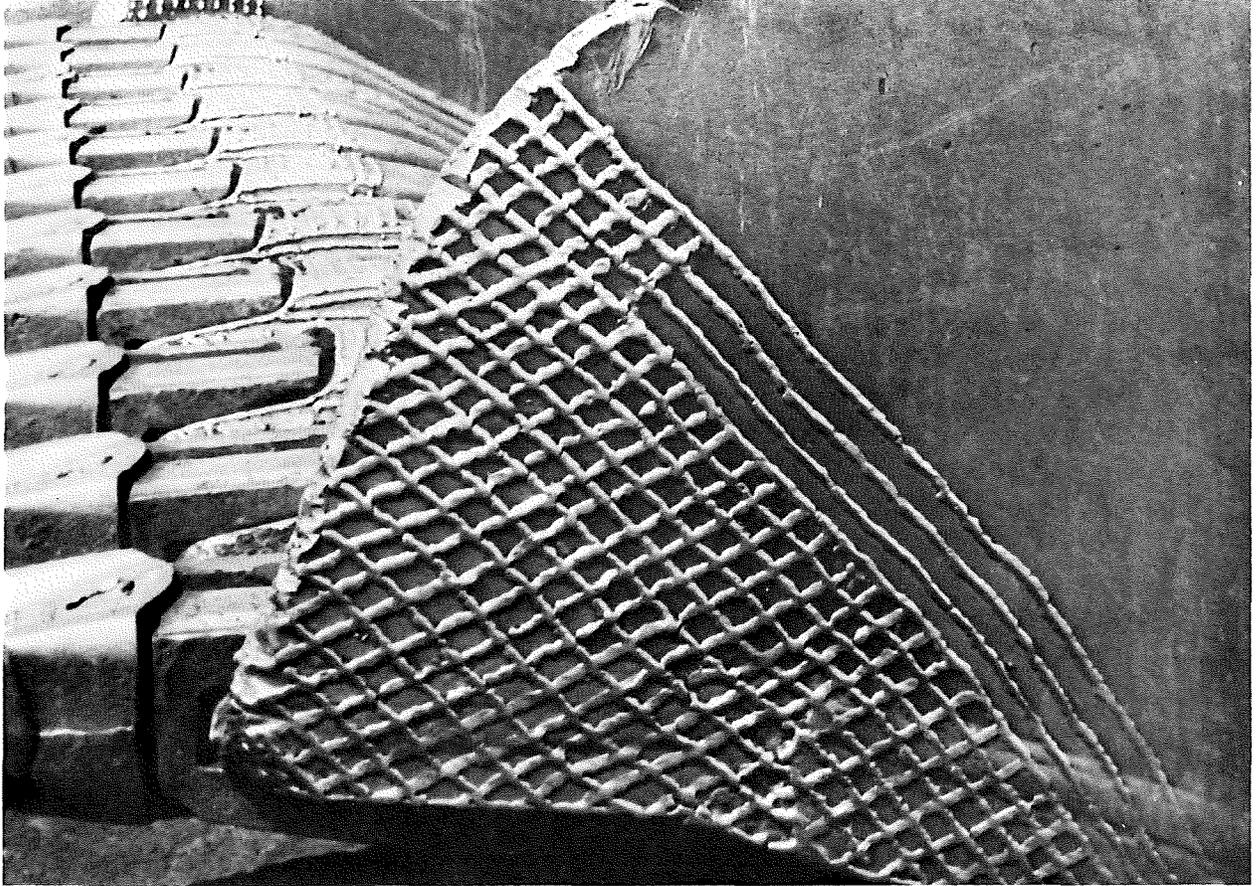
Weld overlay cladding of abrasion resistant alloy welded onto the shovel in open pit mine. Notice the specific clad pattern selected for this coal mining application.
